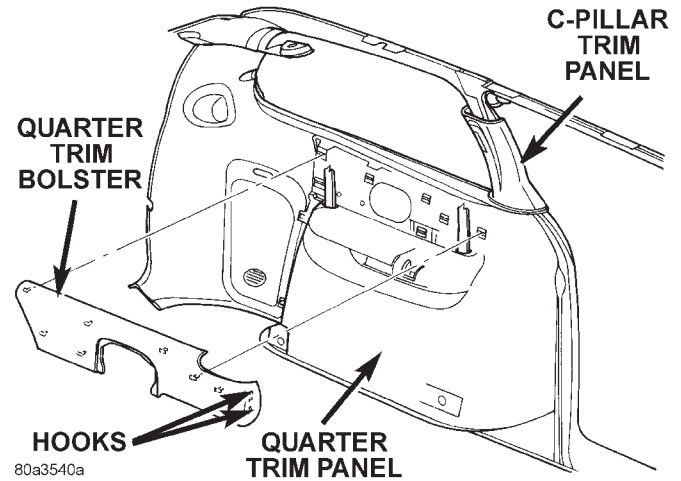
Left Quarter Trim Bolster – LWB Four Door
